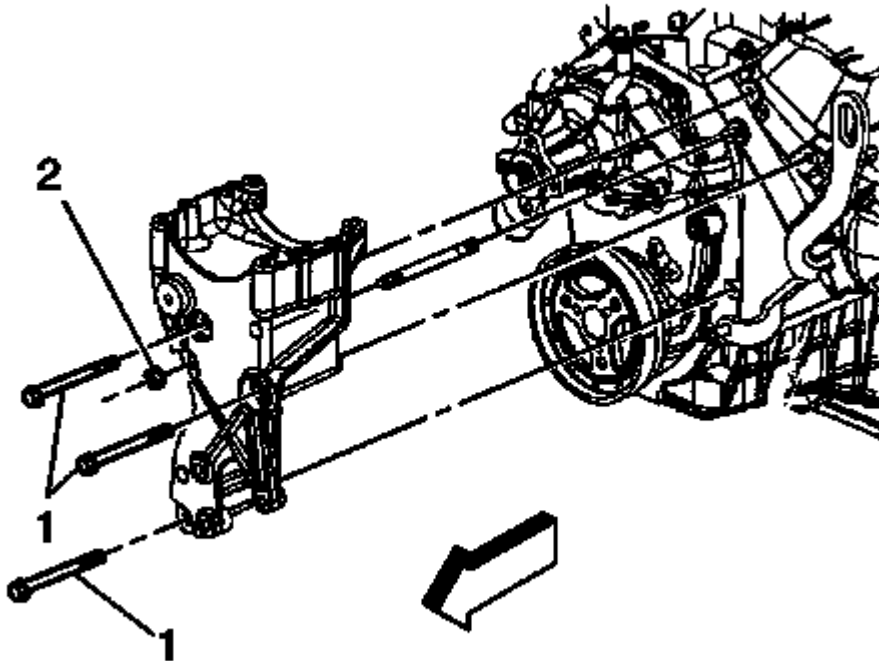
View Of P/S Pump Rear Bracket Front Nut
